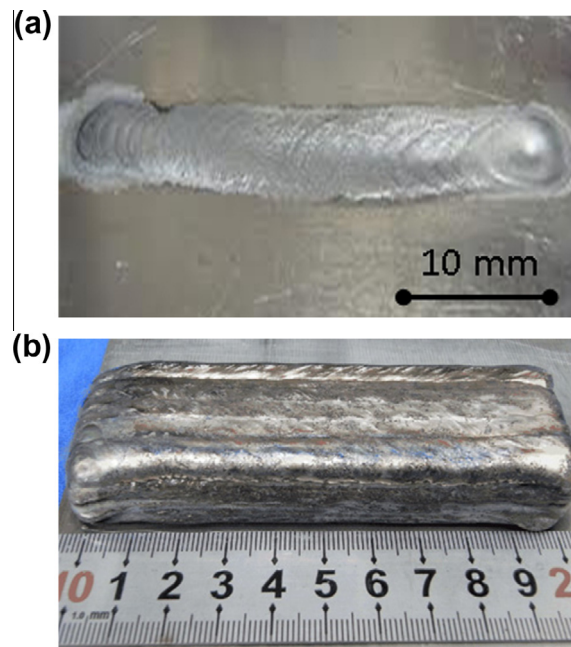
Typical surface repaired using (a) gas tungsten and (b) plasma transferred arc welding [57].
